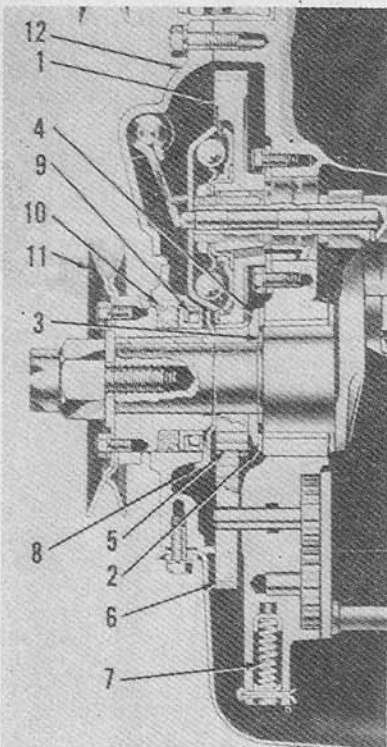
Model TO30 engine crankshaft front oil seal and governor installation. Models TE20 and TO20 are similar. Shims (3) control crankshaft end play.
